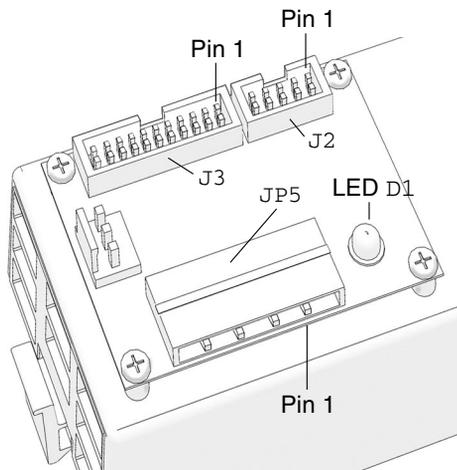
Interposer Board Connectors and Pin Configuration
